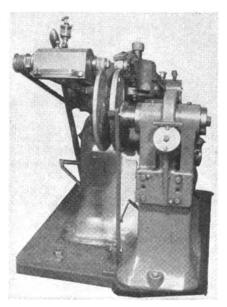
Cams are finished to size by grinding in this special cam grinding machine.
